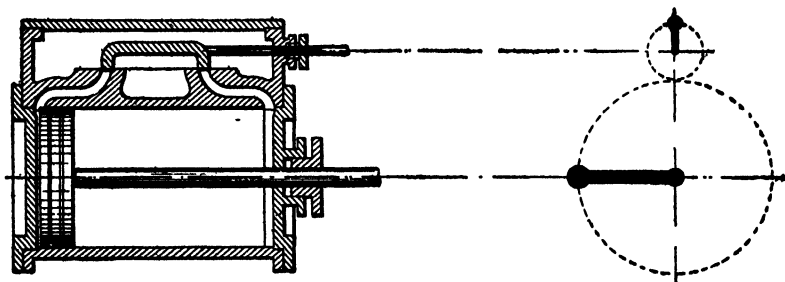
Cylinder Details Showing Plain Slide Valve without Lap in Mid-Position
